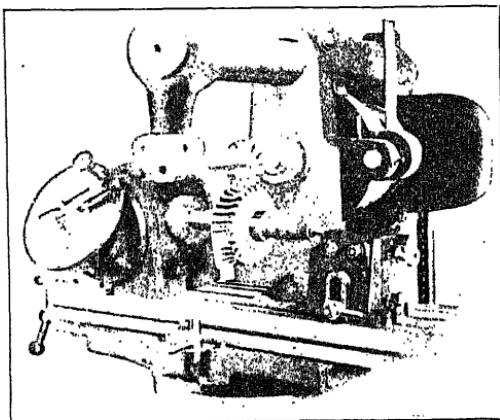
Gashing a worm gear. Kempsmith Mfg. Co.
